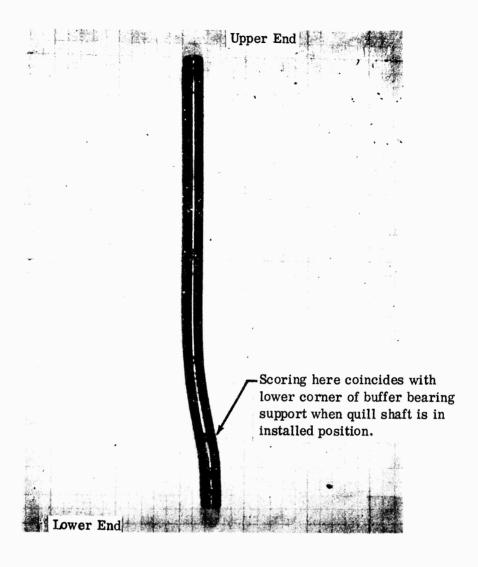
Spin-Pit Drive Quill Shaft After Attempted Proof Spin of Impeller MF-2.
